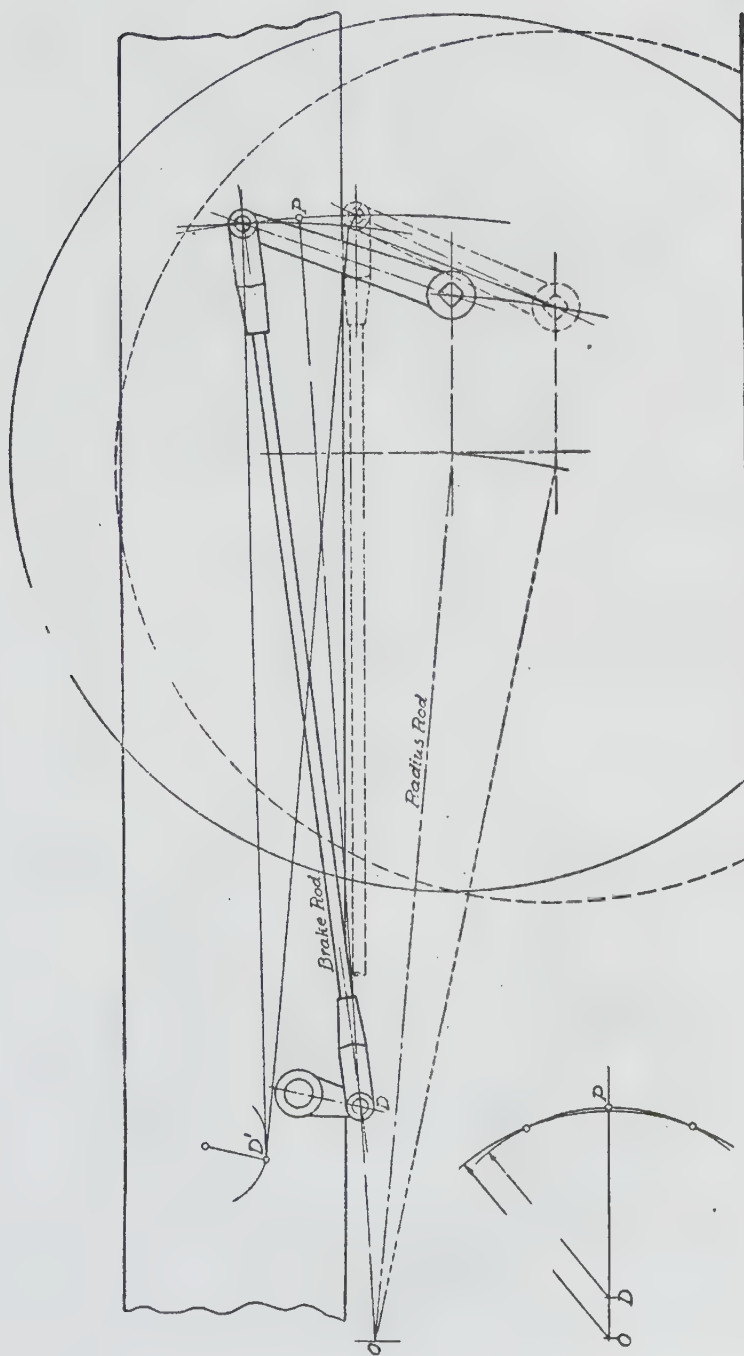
ARRANGEMENT OF BRAKE RODS.
